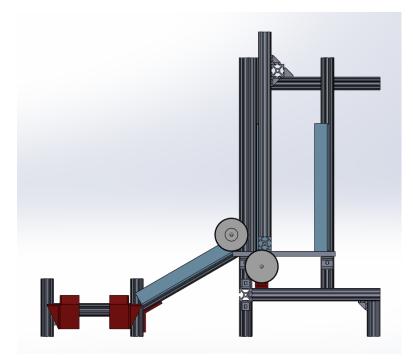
Rendering of Final Pamphlet Dispenser Prototype Design (cutaway View)
